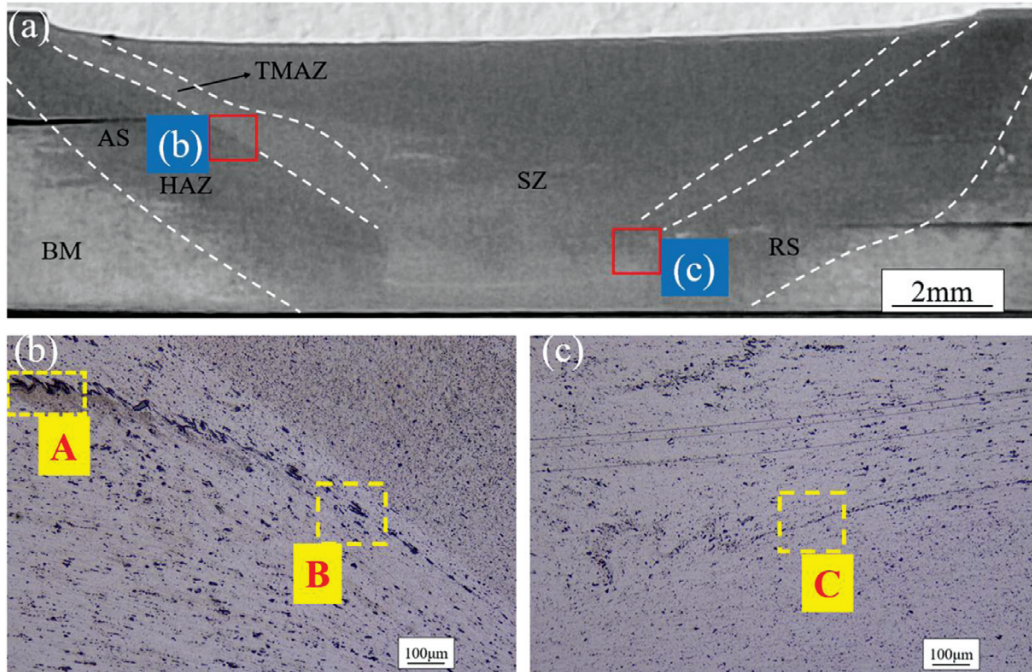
Cross-sections of the PFSWL joints: a) Cross-sectional macroscopic morphology, b) HD, c) CLD
